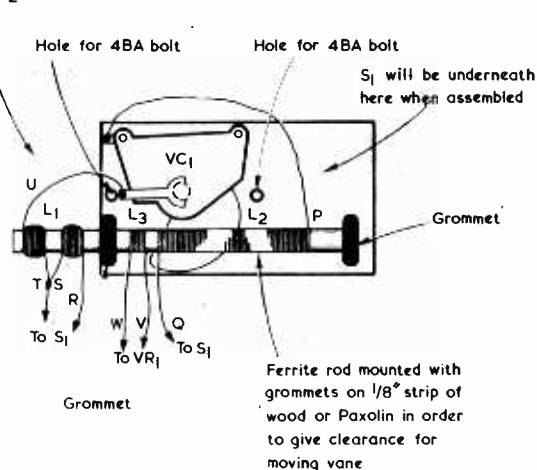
The ferrite rod assembly and the sub-panel on which this and VC1 are mounted. Winding details are given in the text.
